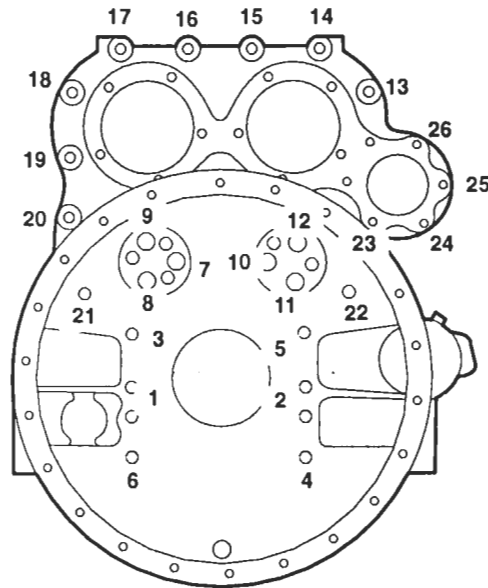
Flywheel Housing Bolt Tightening Sequence (Operation 2)
